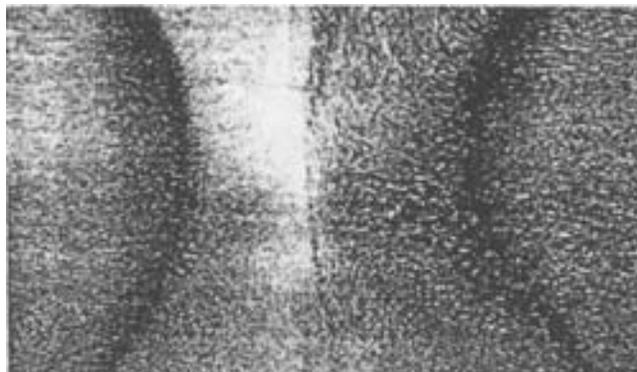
flash weld in 18Ni (200) maraging steel that is free from banding
